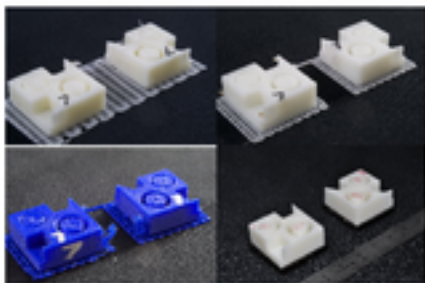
Various views of custom-printed 3D printer nozzle - Top Left - Redshift 4 Top Left, Top Right - BFB Reprint, Bottom Left - BFB 1000, Bottom Right - Overlap 12.000
